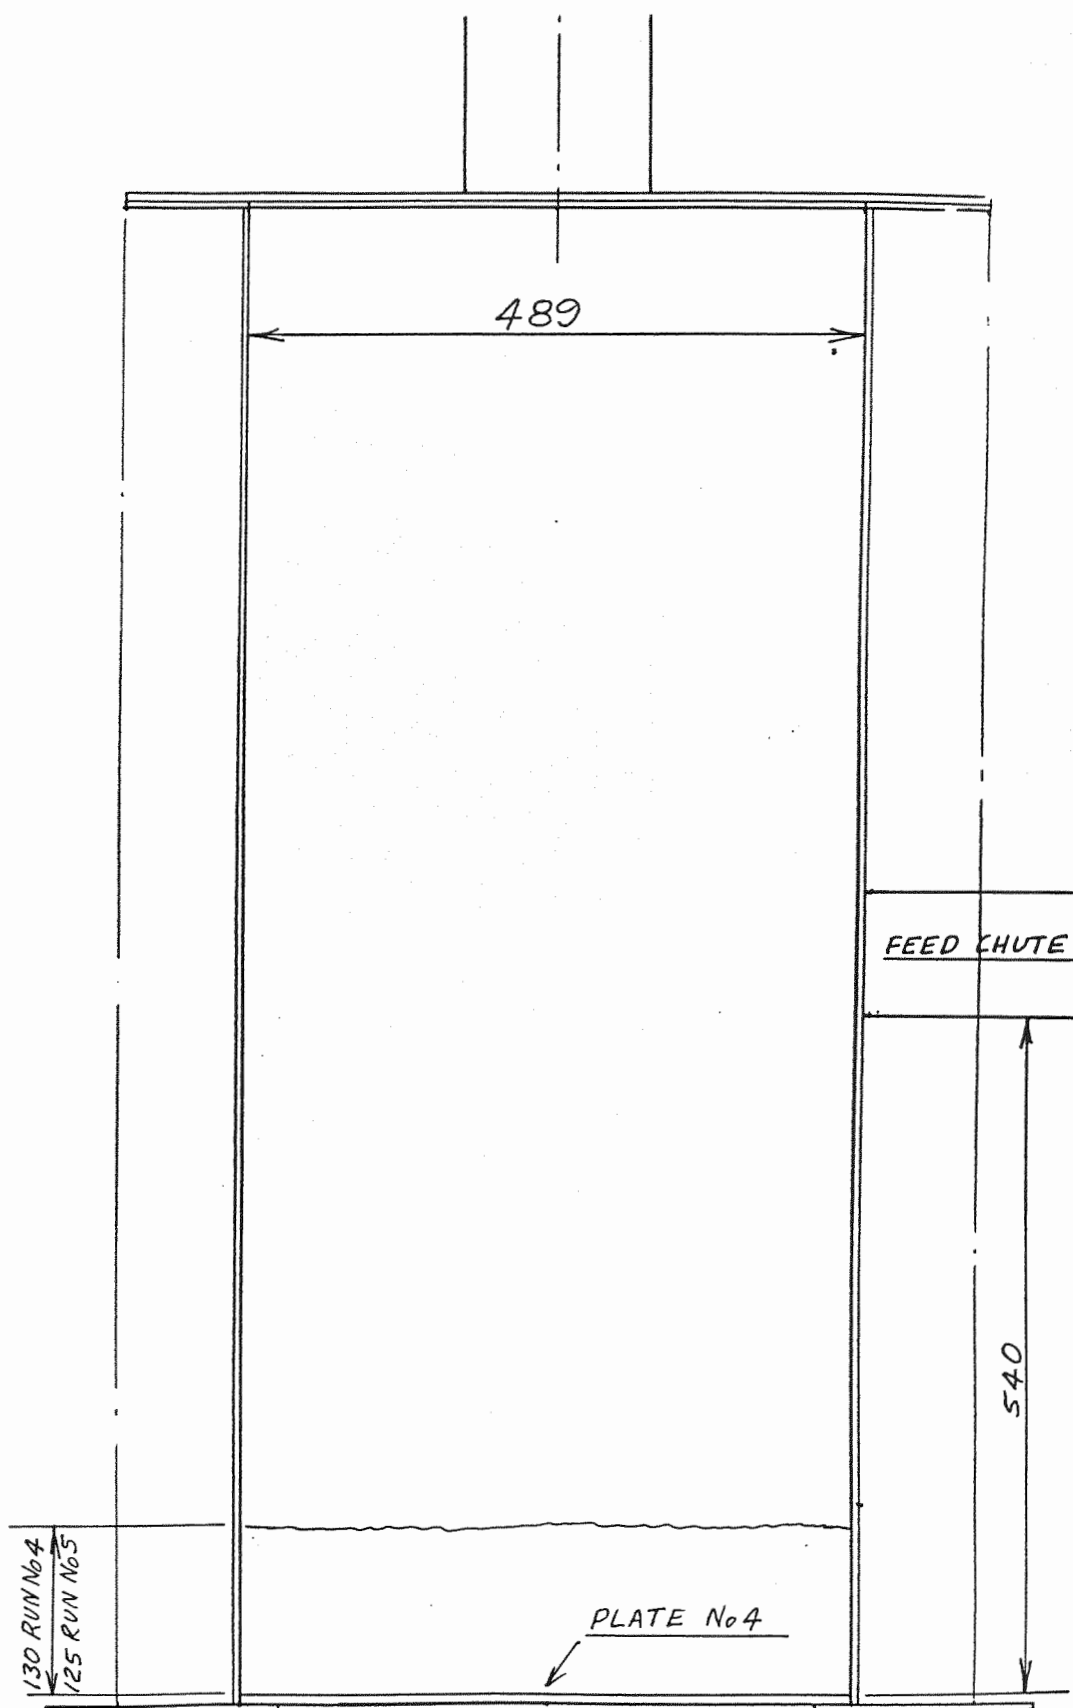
Combustor Tube Details, Combustor Run 6 & 7
